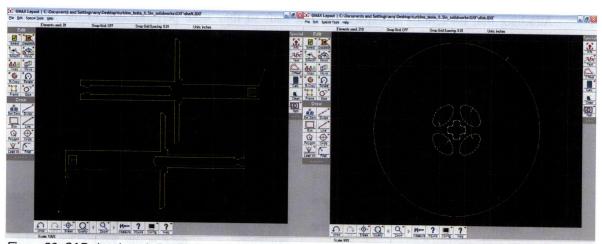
CAD drawing of slide-fit shaft made from 2D sheet
